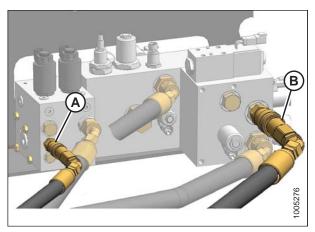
M200 with Reverser ValveA - Auger PressureB - Reel/Auger Return
